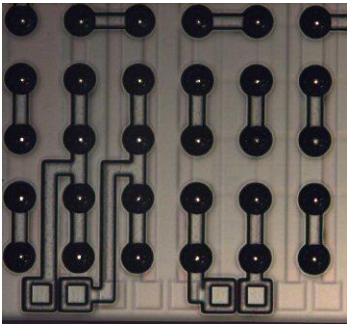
Example of an old bond pad locations, RDL and solder bumps.
